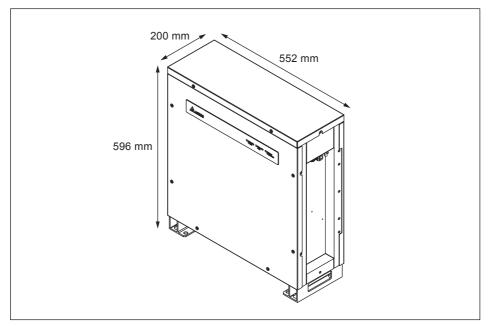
Dimensions of DELTA BX\_6.0 Battery Pack
